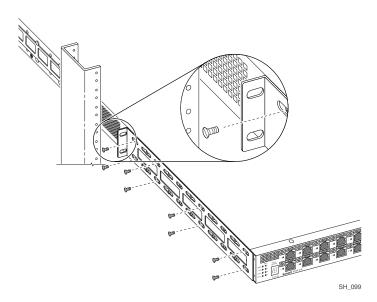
Fastening the Rear Mounting Brackets—Two-Post Rack
